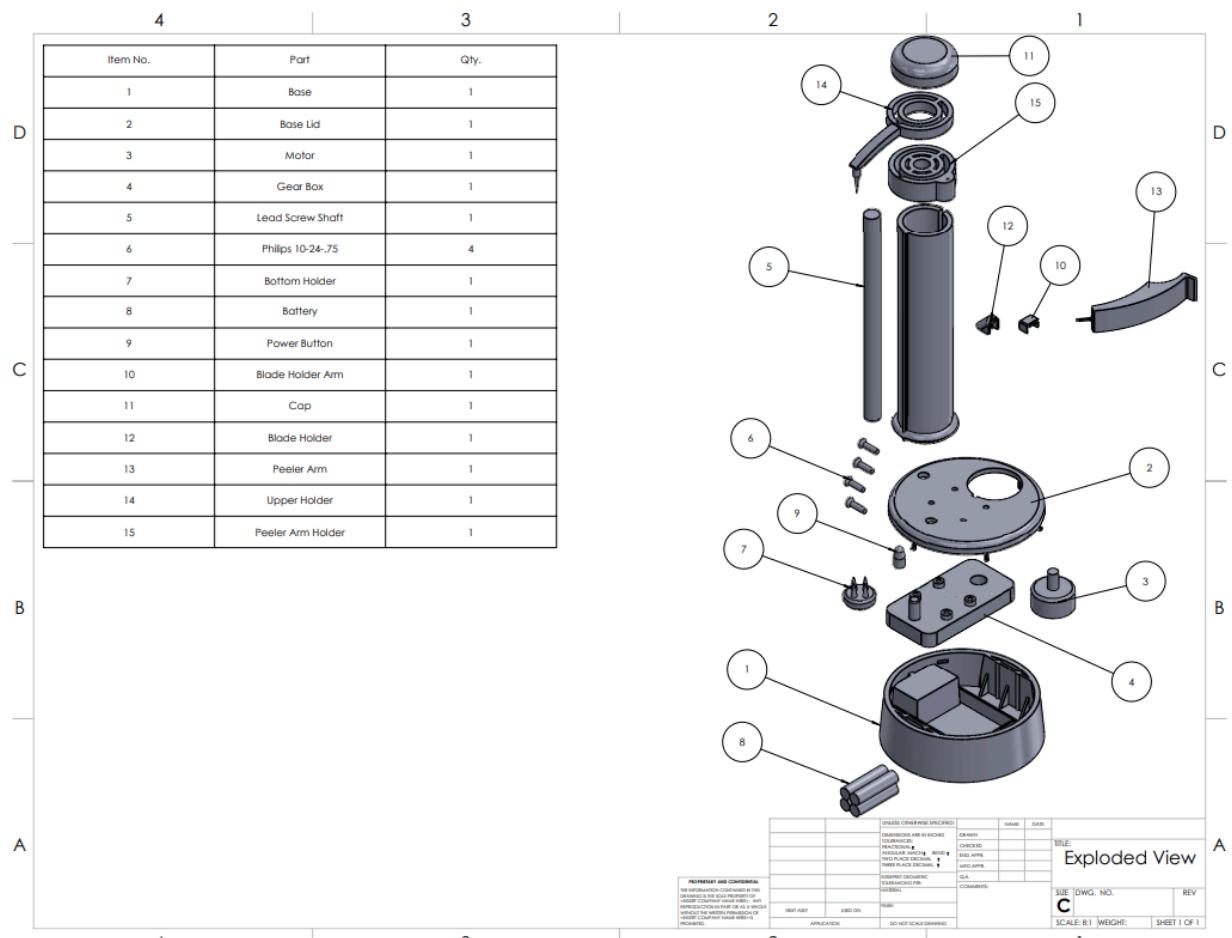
Exploded View Drawing of the Redesigned Motorized Peeler
